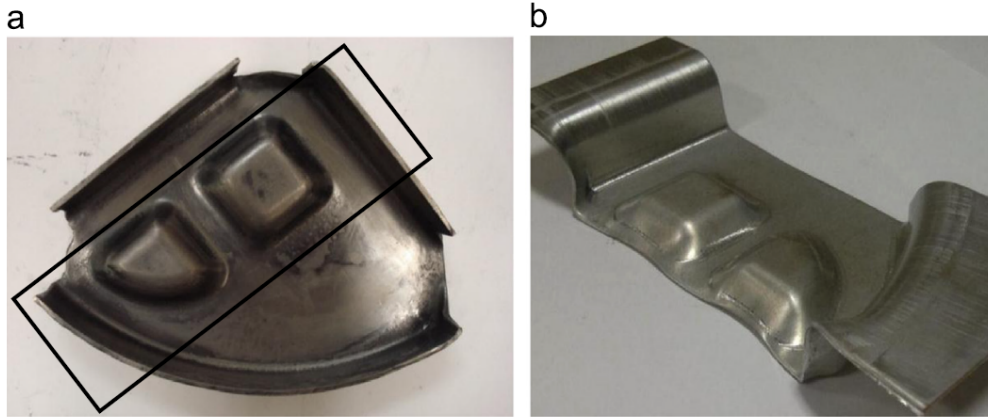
(a) Formed whole sheet metal shape and trimmed part of the sheet metal and (b) section formed, highlighted by rectangle in (a). [6]
